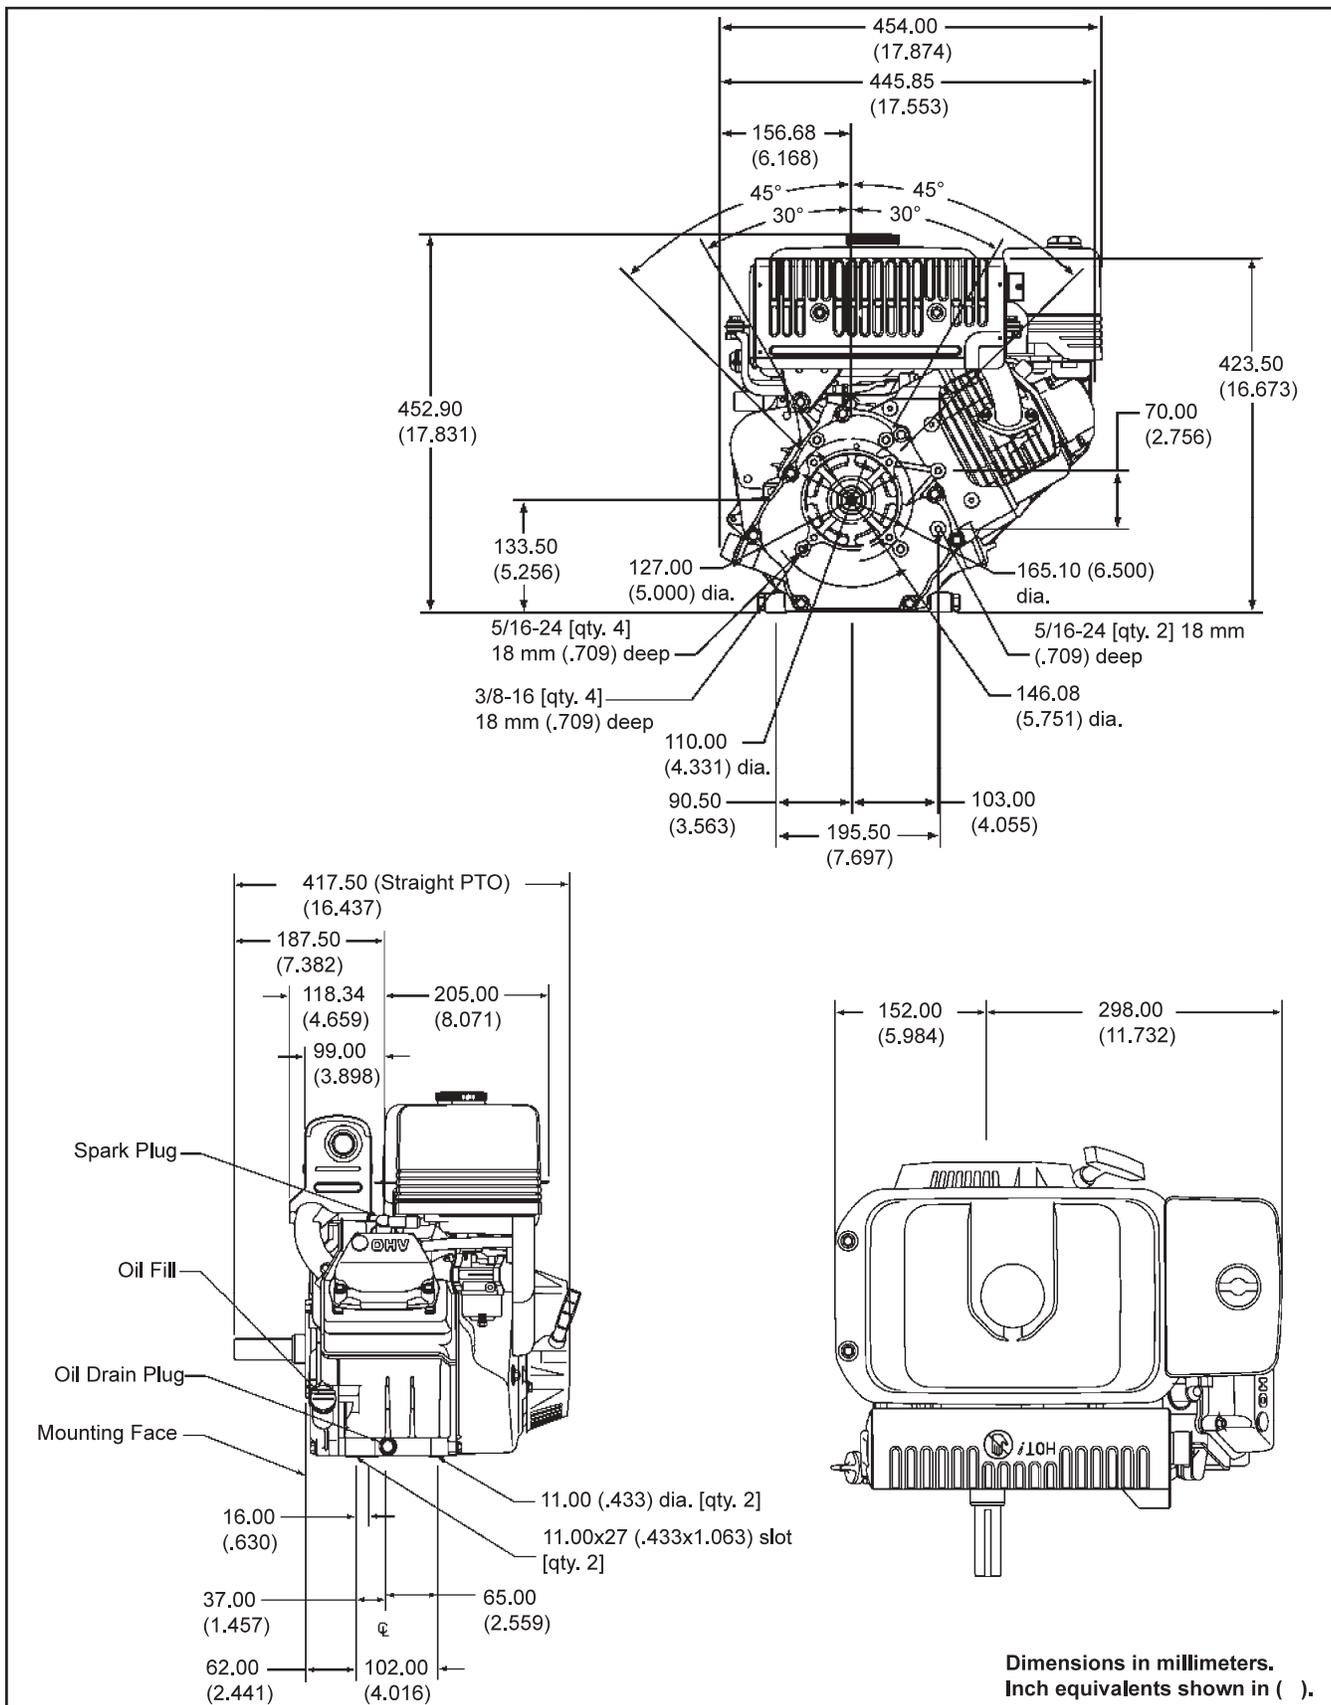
Typical Engine Dimensions CS8.5 (spec. 92xxxx), CS10, and CS12 - 12.75.
